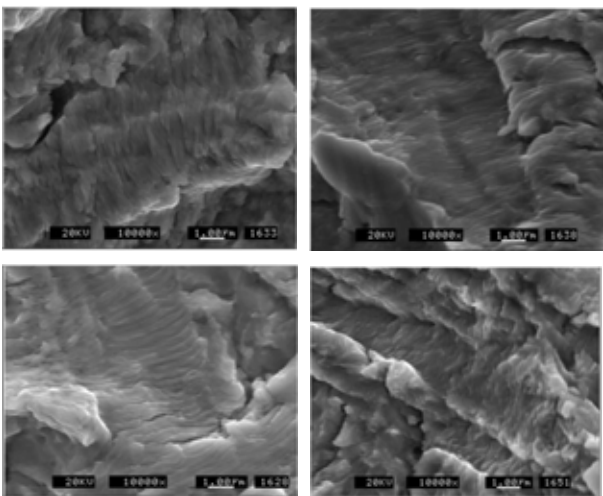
Fatigue fracture surfaces of base and welded metals (QT)
